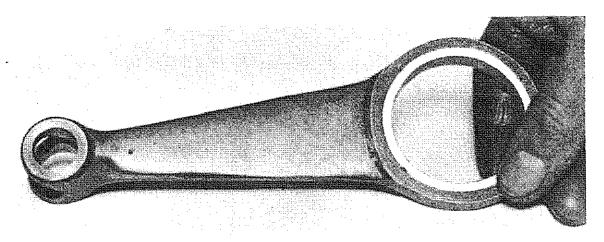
Showing Centre-Punch Mark on Con Rob. This side faces flywheel.
